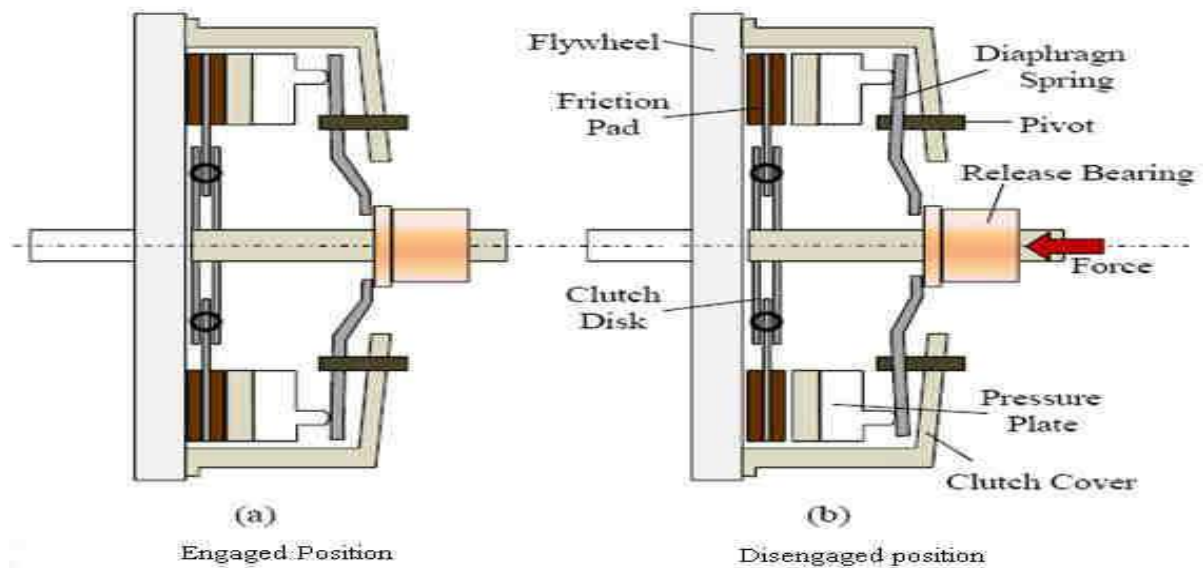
(a) shows the engagement position of clutch plates, during this the clutch pedal is engaged with flywheel which transmit power from the engine to the clutch and it is transmitted towards the transmission. Fig (b) shows the disengagement of clutch plates, which does not transmit power towards the transmission.
